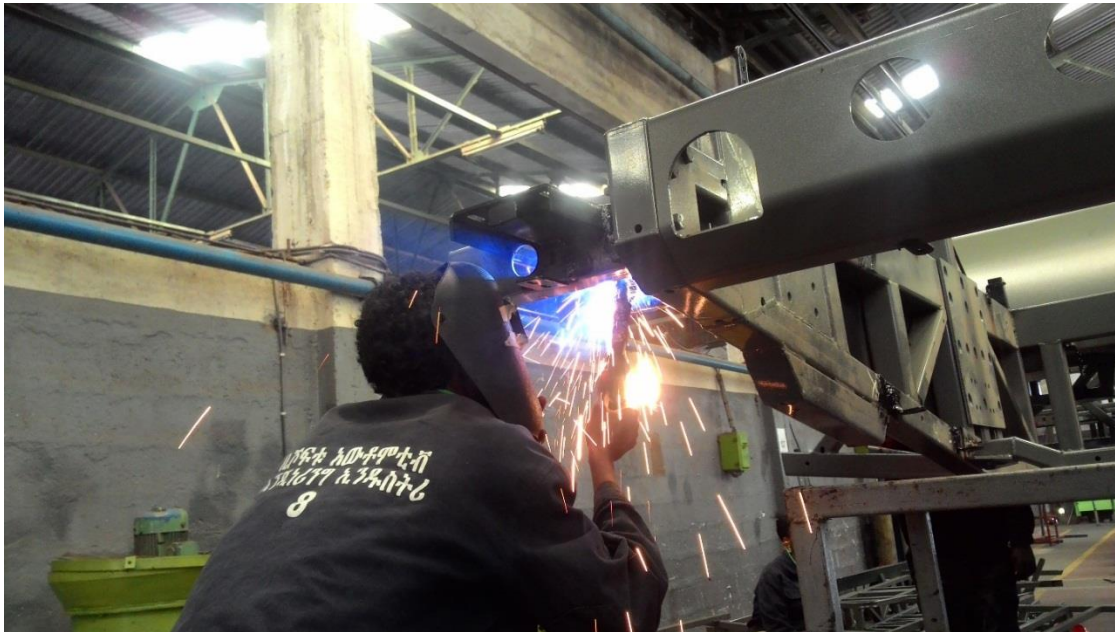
Body and Frame production factory line overhead welding assembly
